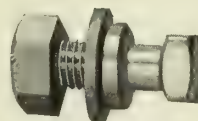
Bronze Attachment for Cast Iron Frames or Mullions
